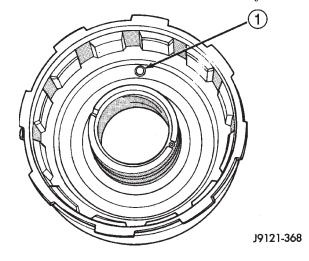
Front Clutch Piston Retainer Check Ball Location
